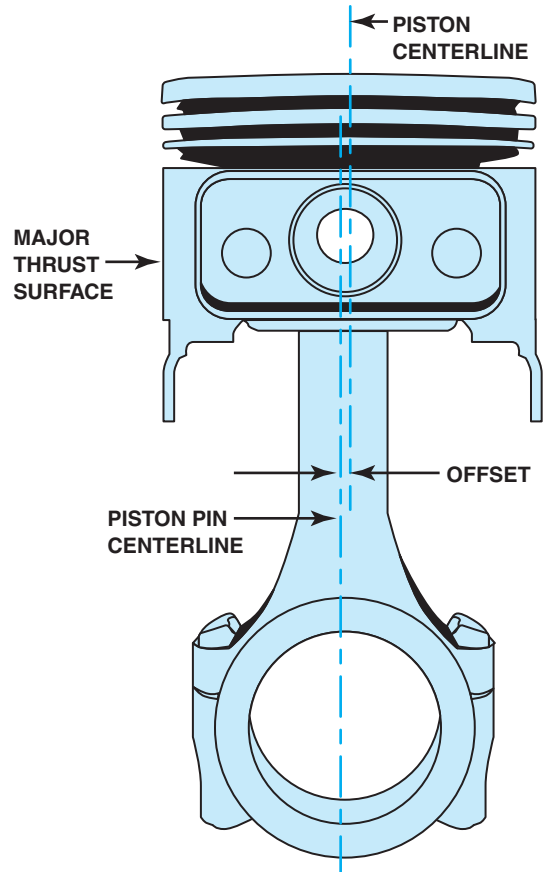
Piston pin offset toward the major thrust surface.
